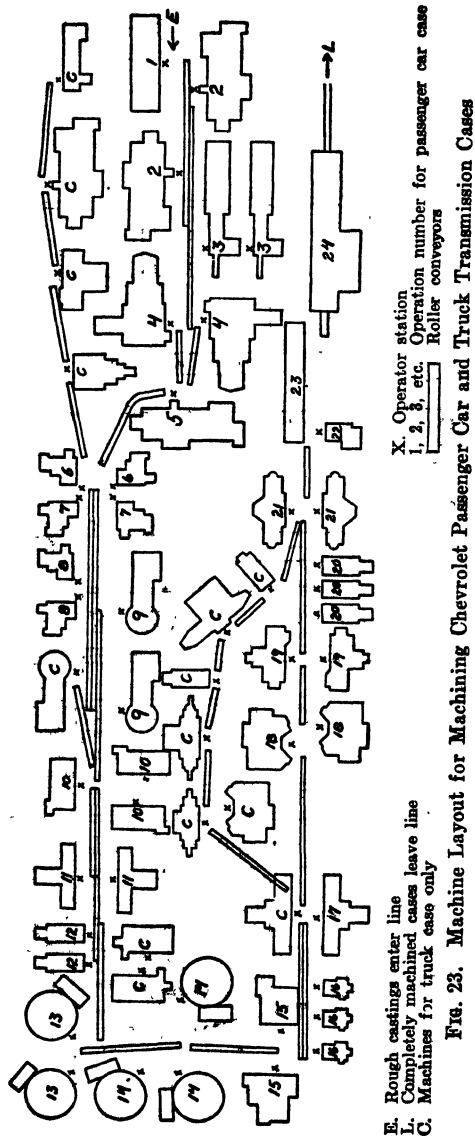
Machine Layout for Machining Chevrolet Passenger Car and Truck Transmission Cases
